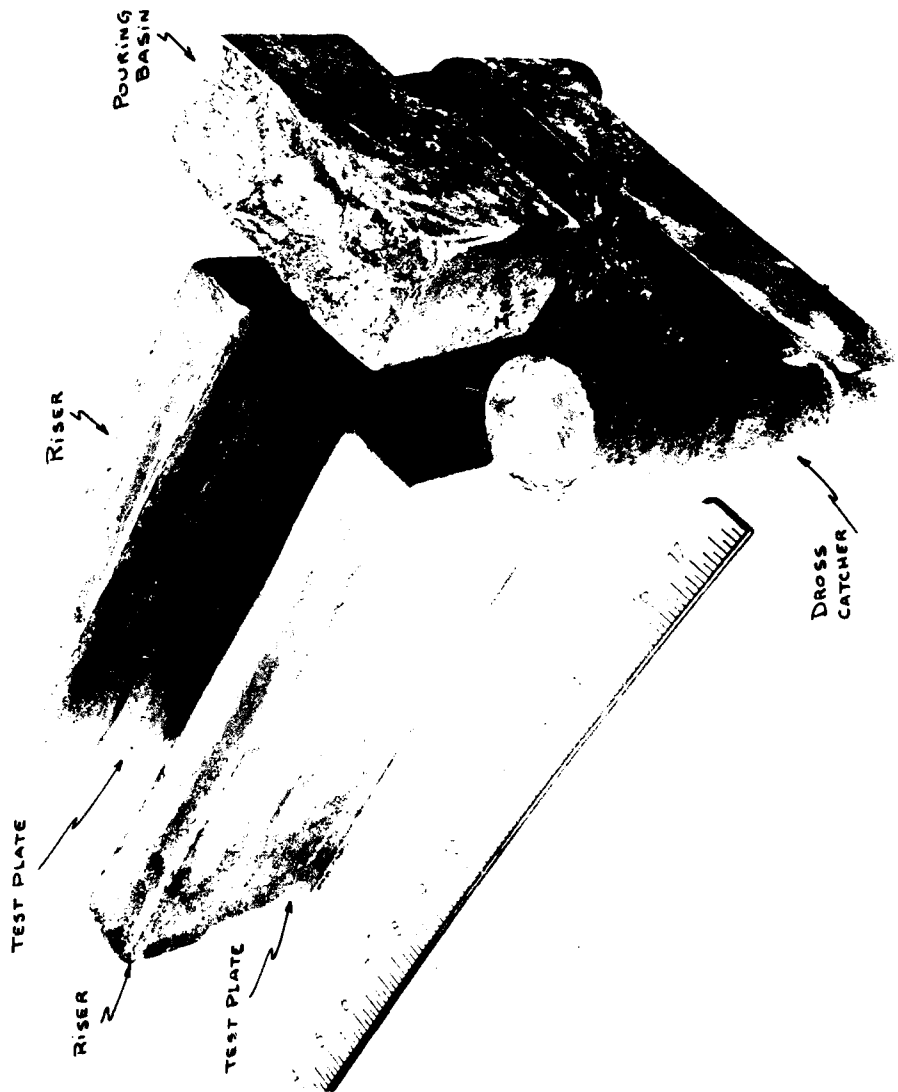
ALUMINUM BRONZE TEST PLATE CASTING ARRANGEMENT
